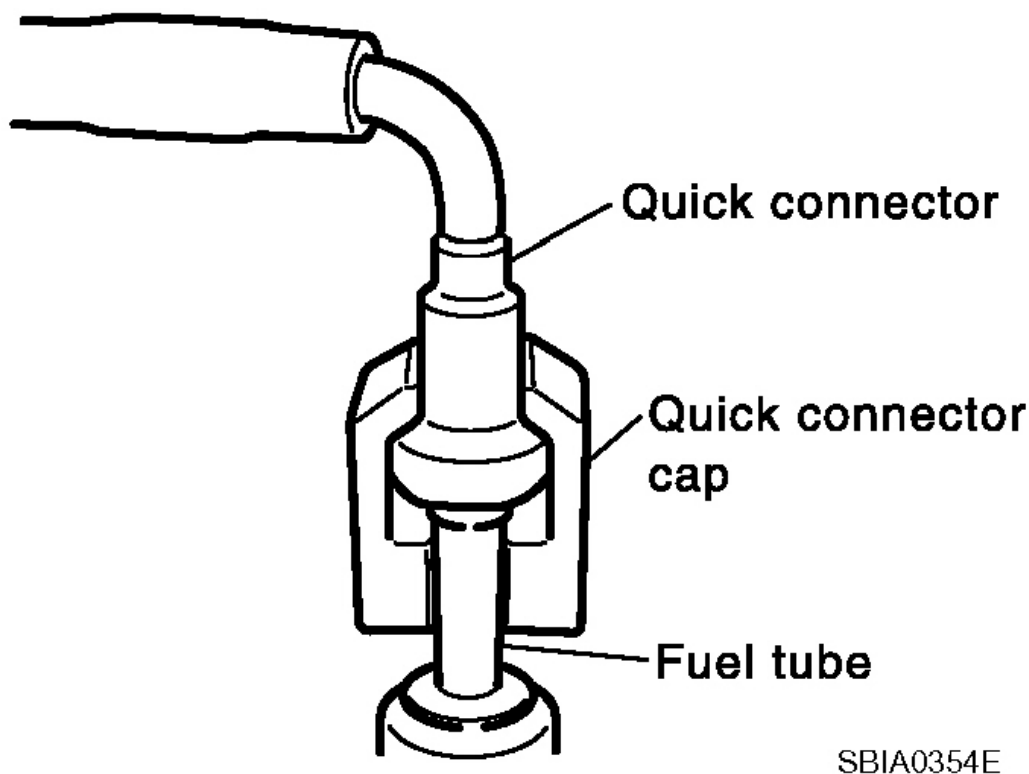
Identifying Fuel Feed Hose On Engine Side
